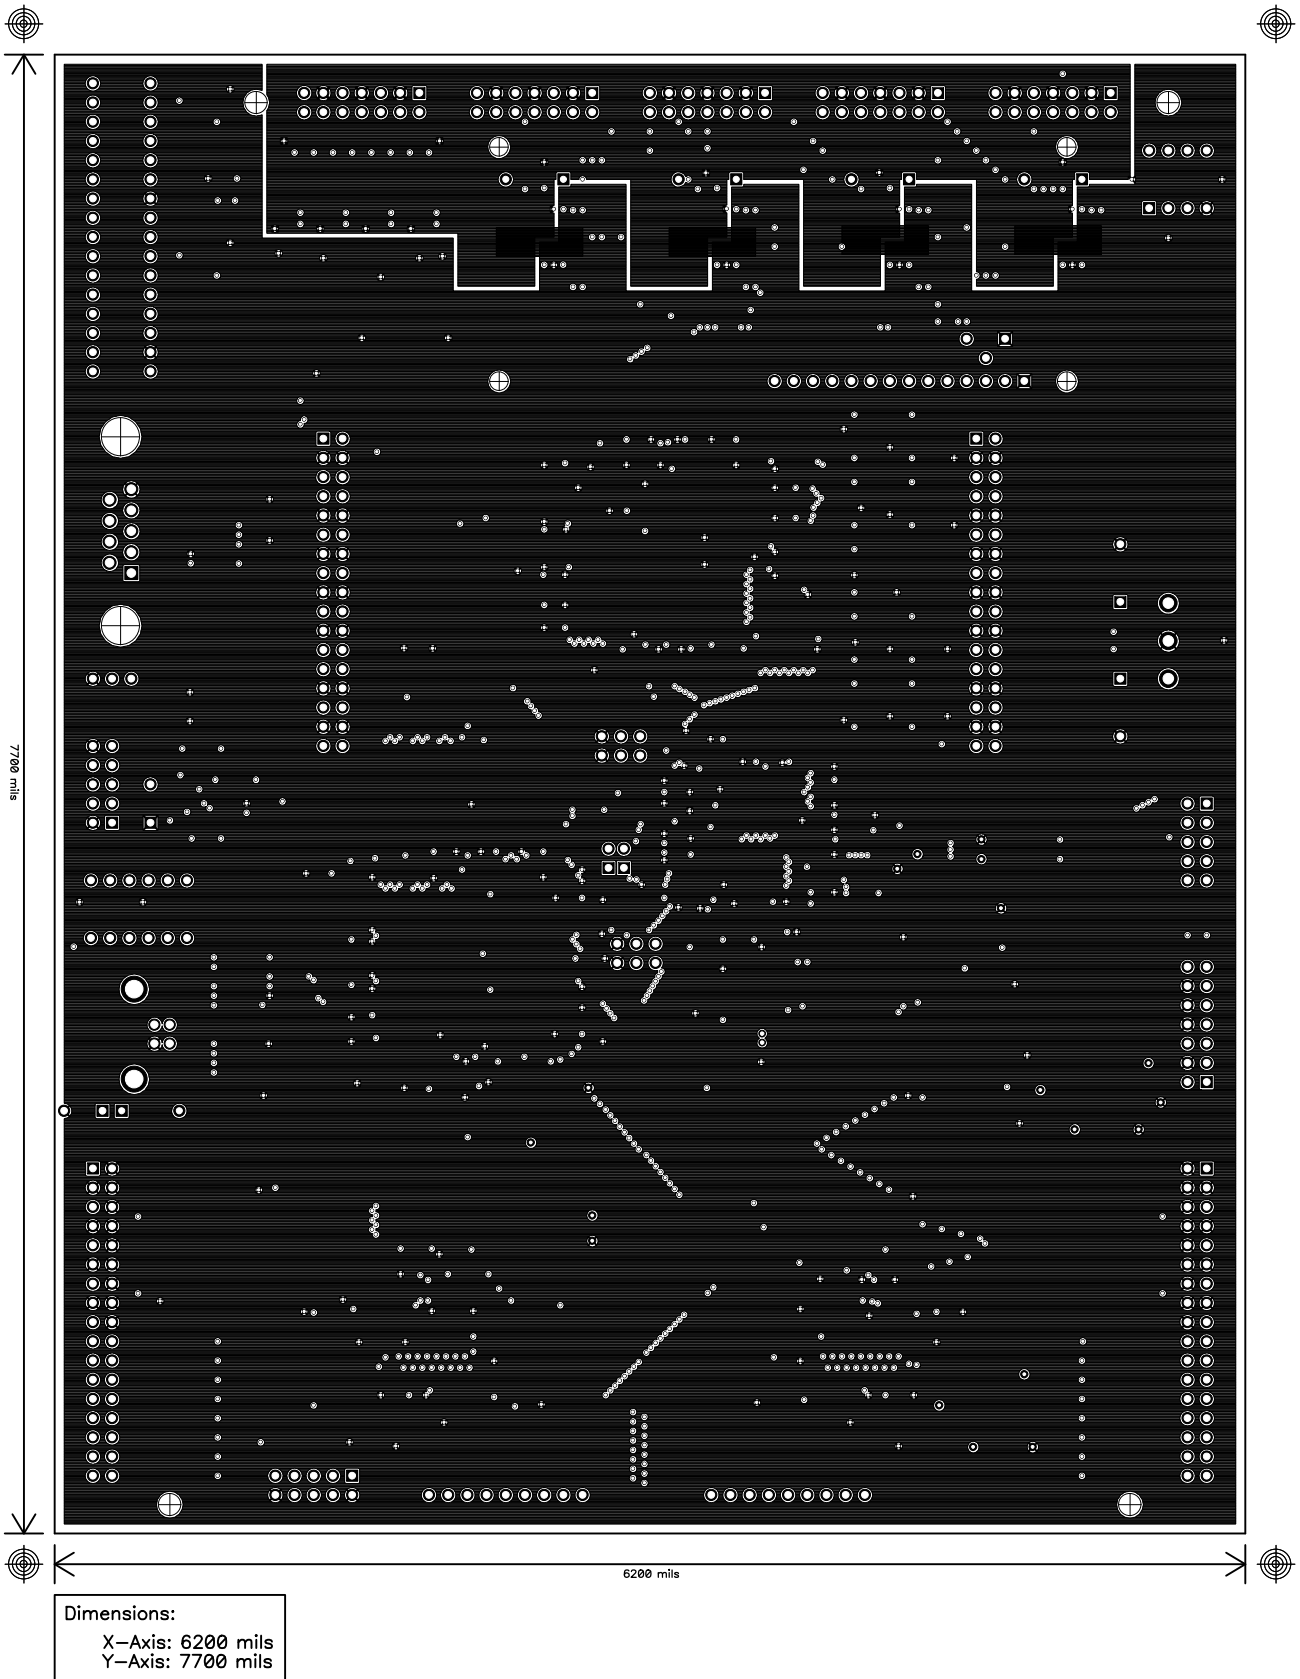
Printed Circuit Board Layout of the PEC33 BOTTOM Layer
